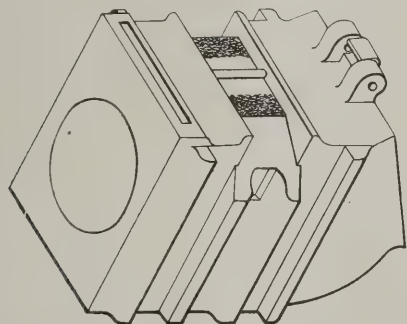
Building Up Worn Journal Box; Gas Welding Used
